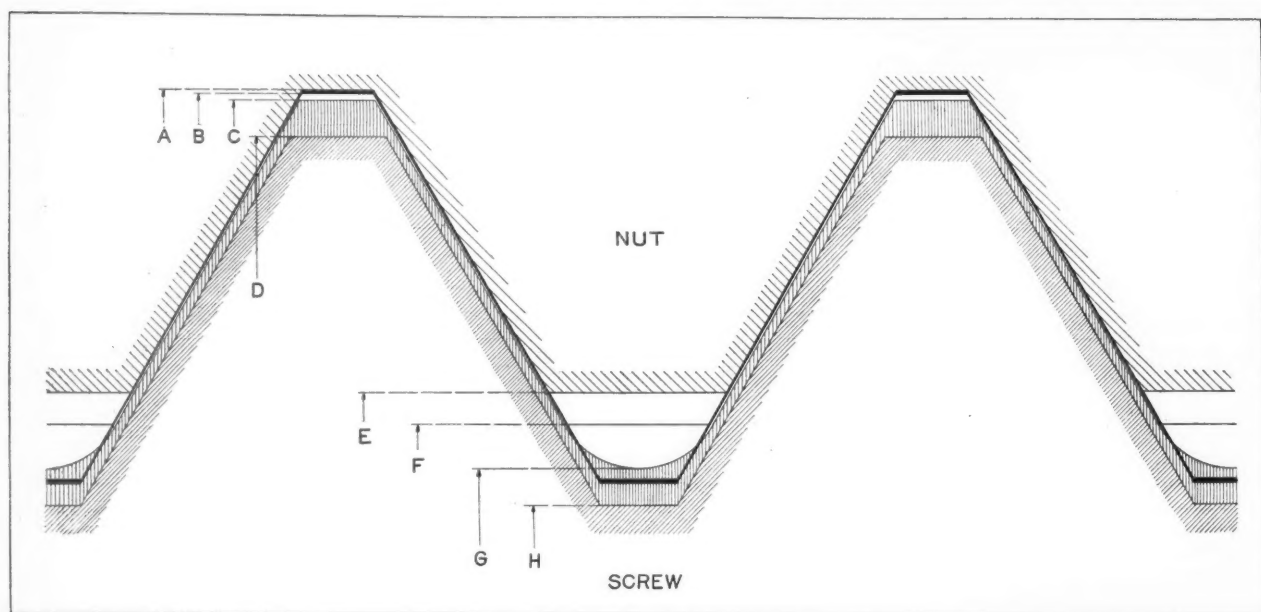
Clearance and Tolerances on United States Standard Tap, Nut, and Screw Threads
